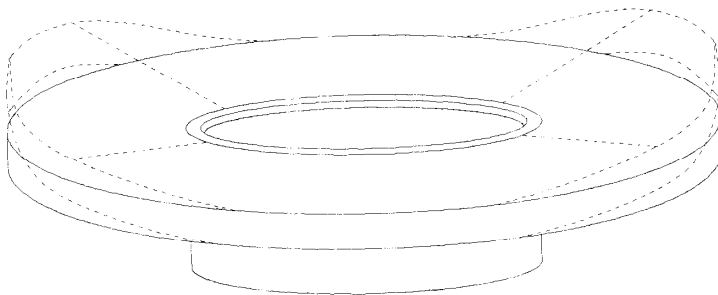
(b): Butterfly shape imparted to a disc brake rotor (Eggleston [2000])
